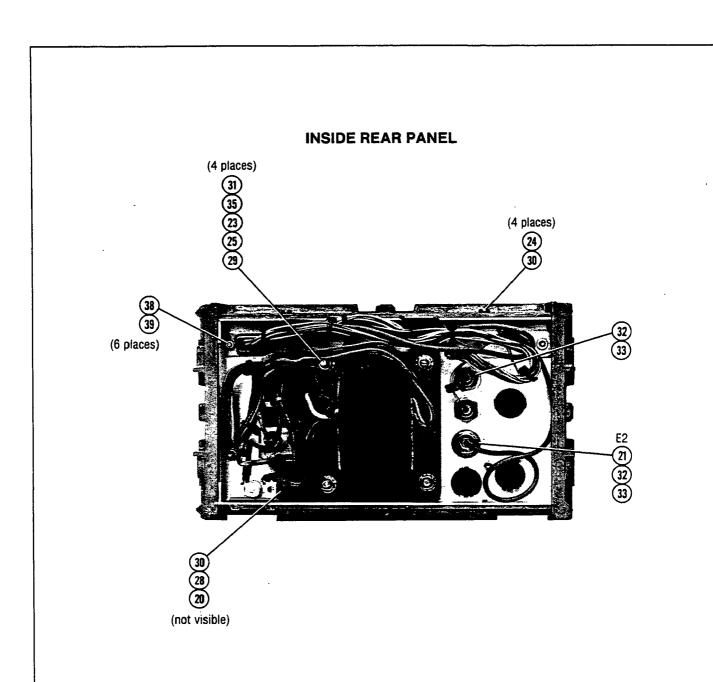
Attaching Hardware, Rear View (1 of 9)
